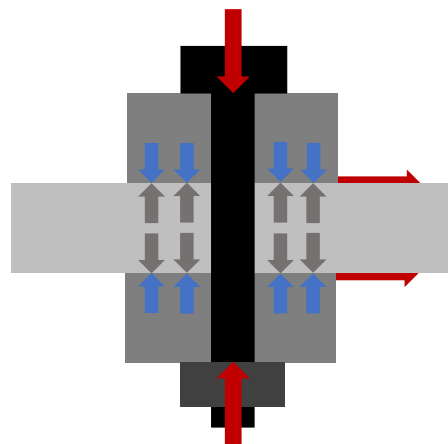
FORCES INVOLVED IN A BOLTED CLAMP JOINT
